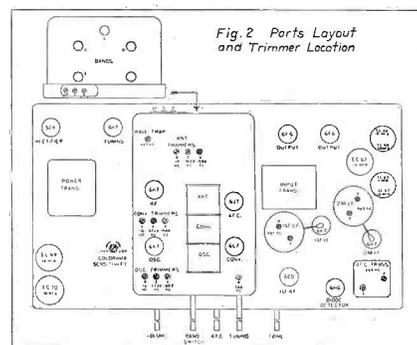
G.E. E-129 parts layout and trimmer locations.
